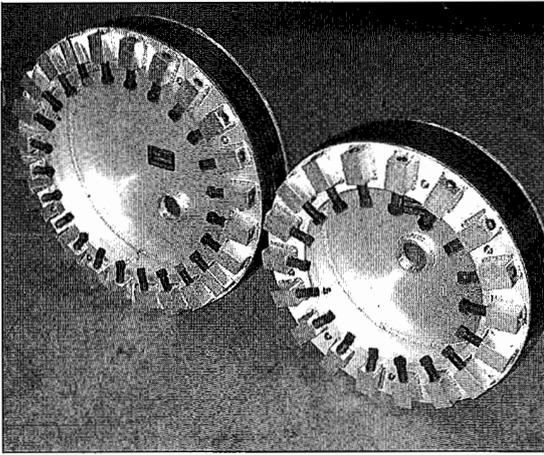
Fabricated aluminum pneumatic test plugs.
